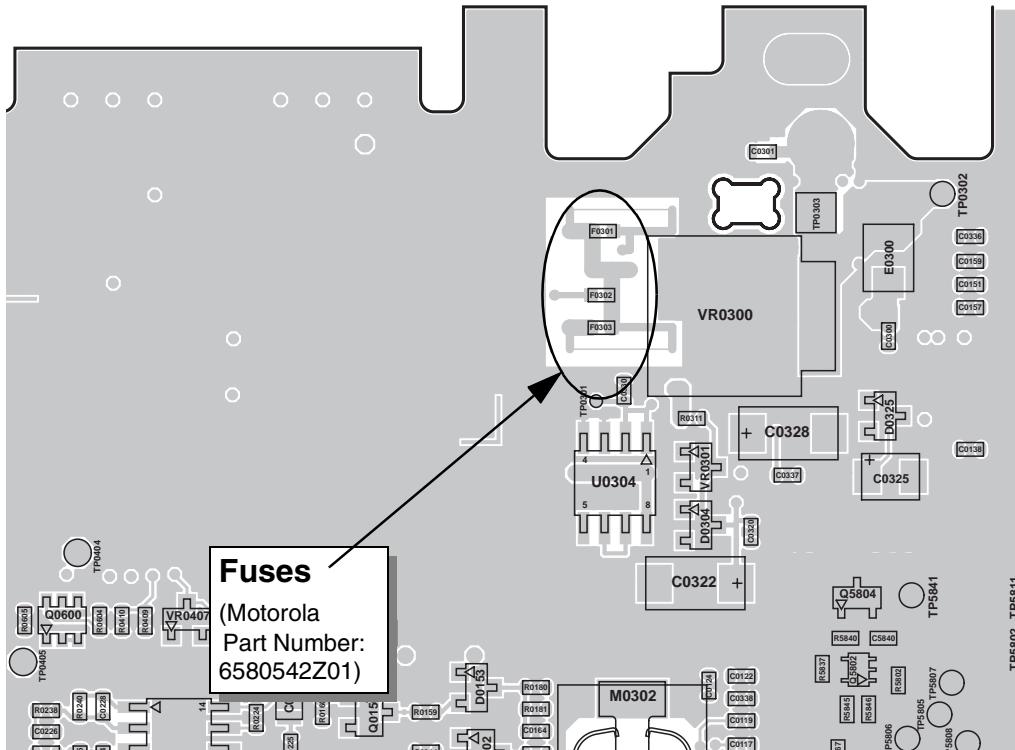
Position of Fuse F0301/2/3 (PCB Mainboard - TOP View)
